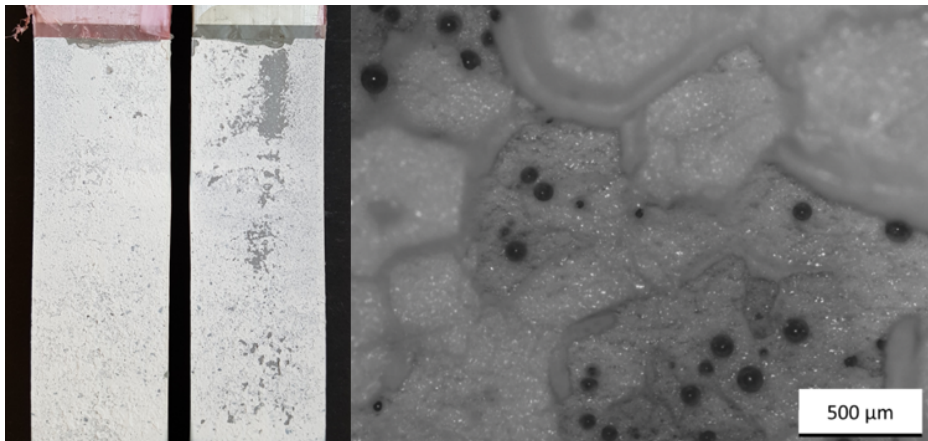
Fracture surface of a C-joint ablated with $ED=1.71 \text{ J/mm}^2$ and $H=50 \mu\text{m}$ [149]
